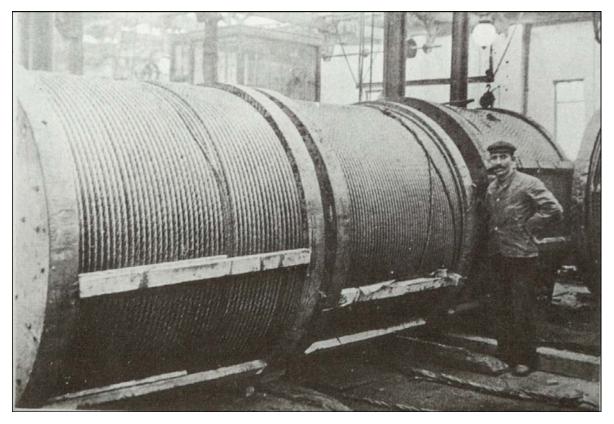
The ropeway as delivered to the site before installation (Photo courtesy of A Jenkins)
